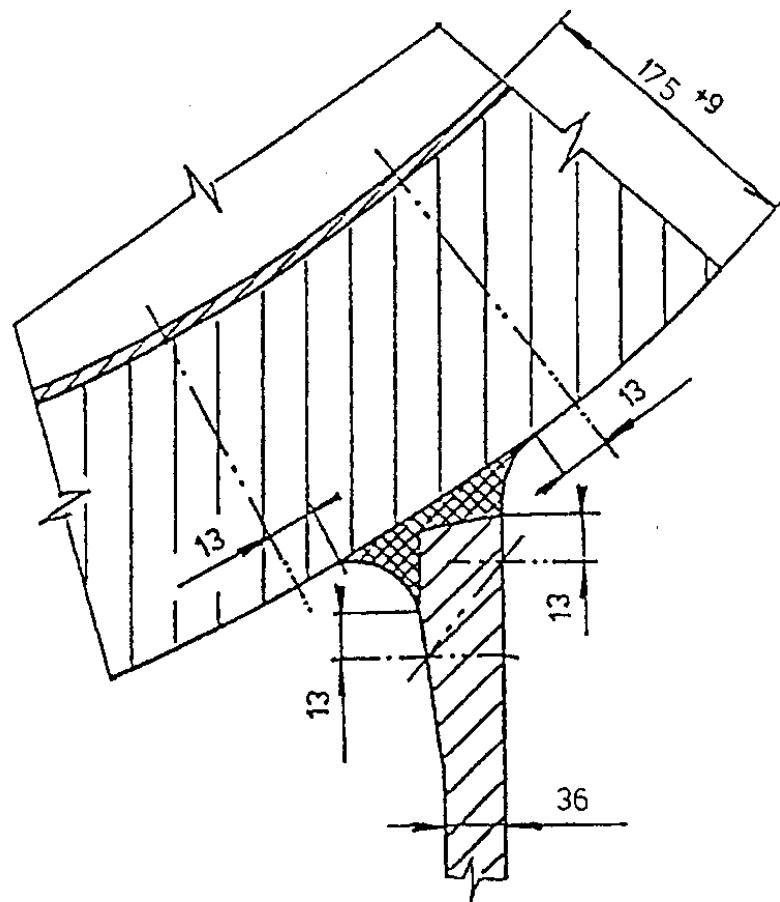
Lower bottom of pressurizer in the place of welded support – wall thickness 175 mm.
